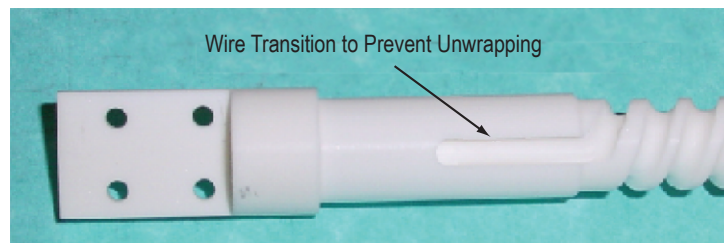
Wire transition from the spiral wrap at end of mandrel (complete mandrel design with dimensions is included in figure 65).
